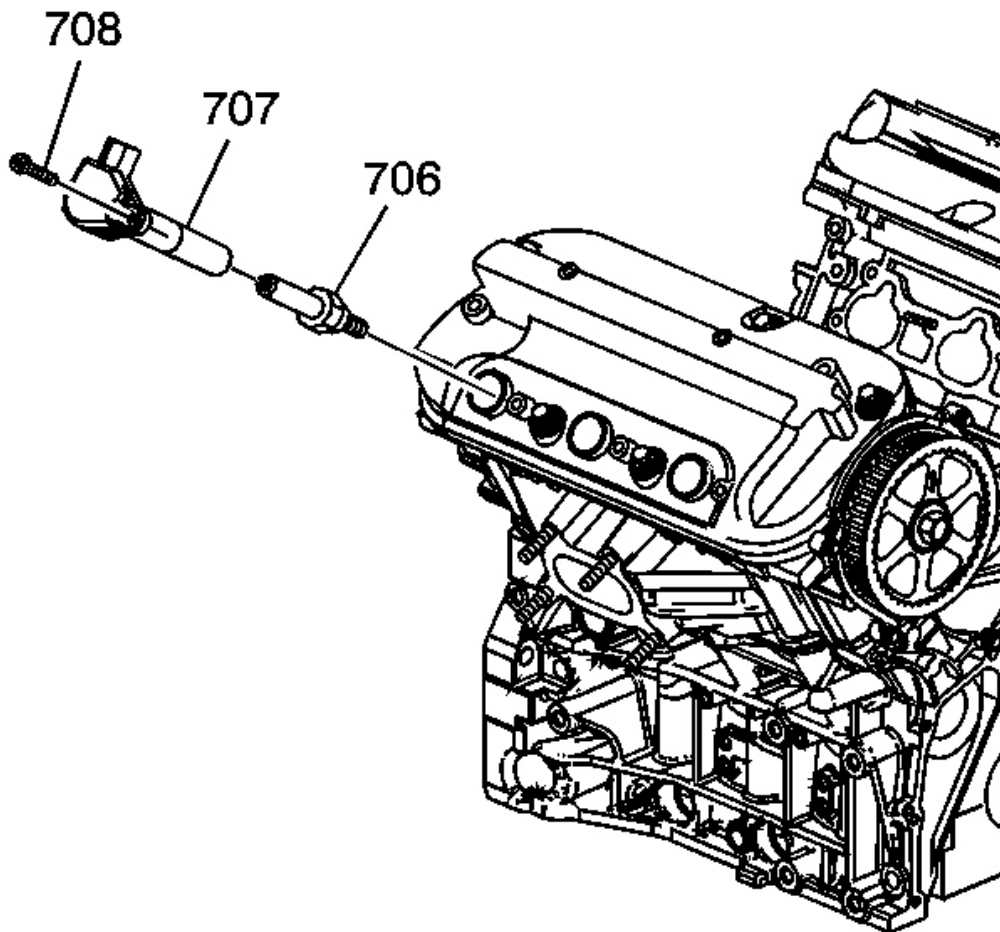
Identifying Spark Plugs, Ignition Coils & Bolts
